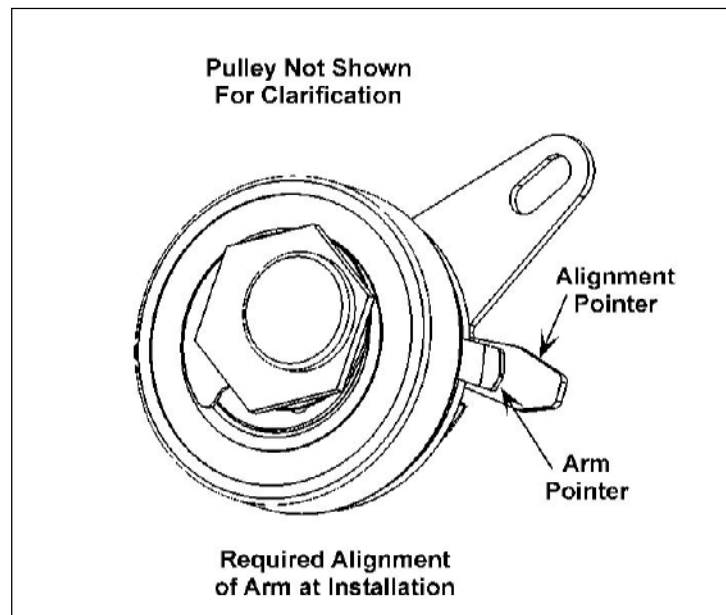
TBT Pointer Alignment for proper Layout Installation
